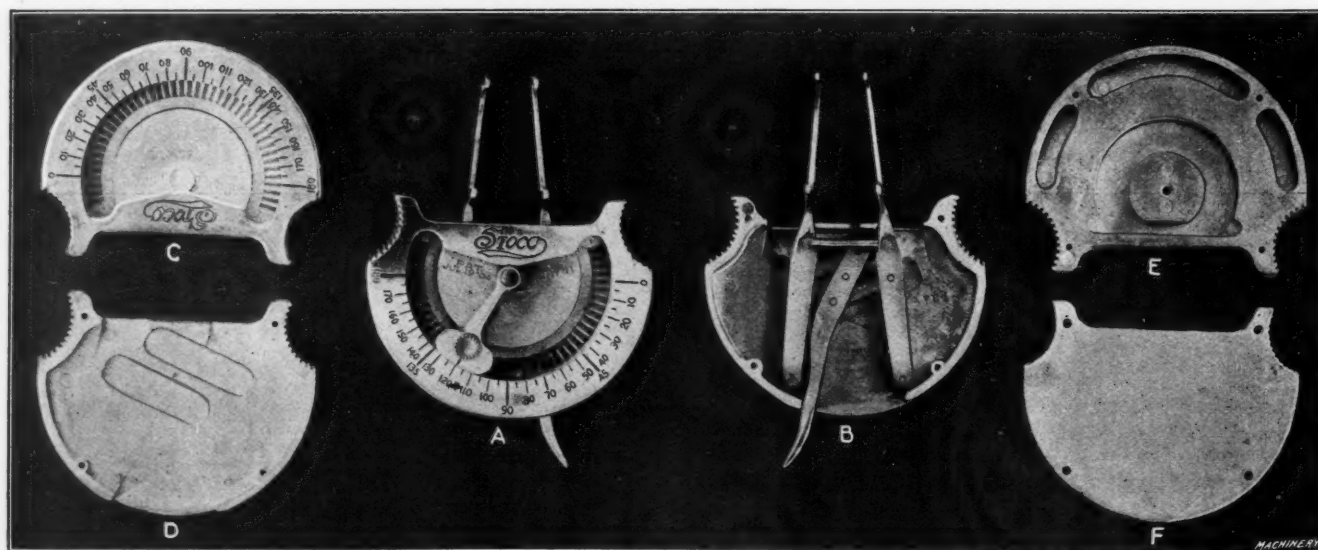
"Stoco" Inclinometer with Face and Back Views of its Parts
